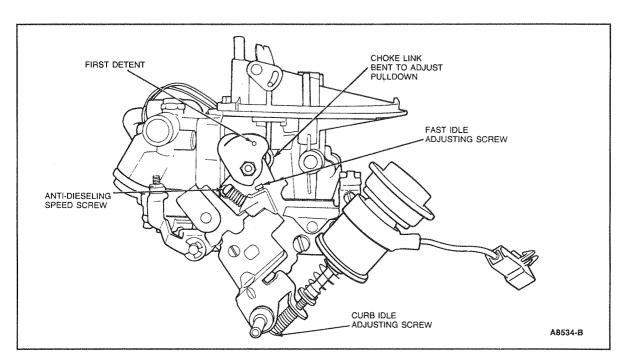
6.1L Engine with 2380 EG2V-Curb Idle, Anti-Dieseling and Fast Idle Speed Adjustments
